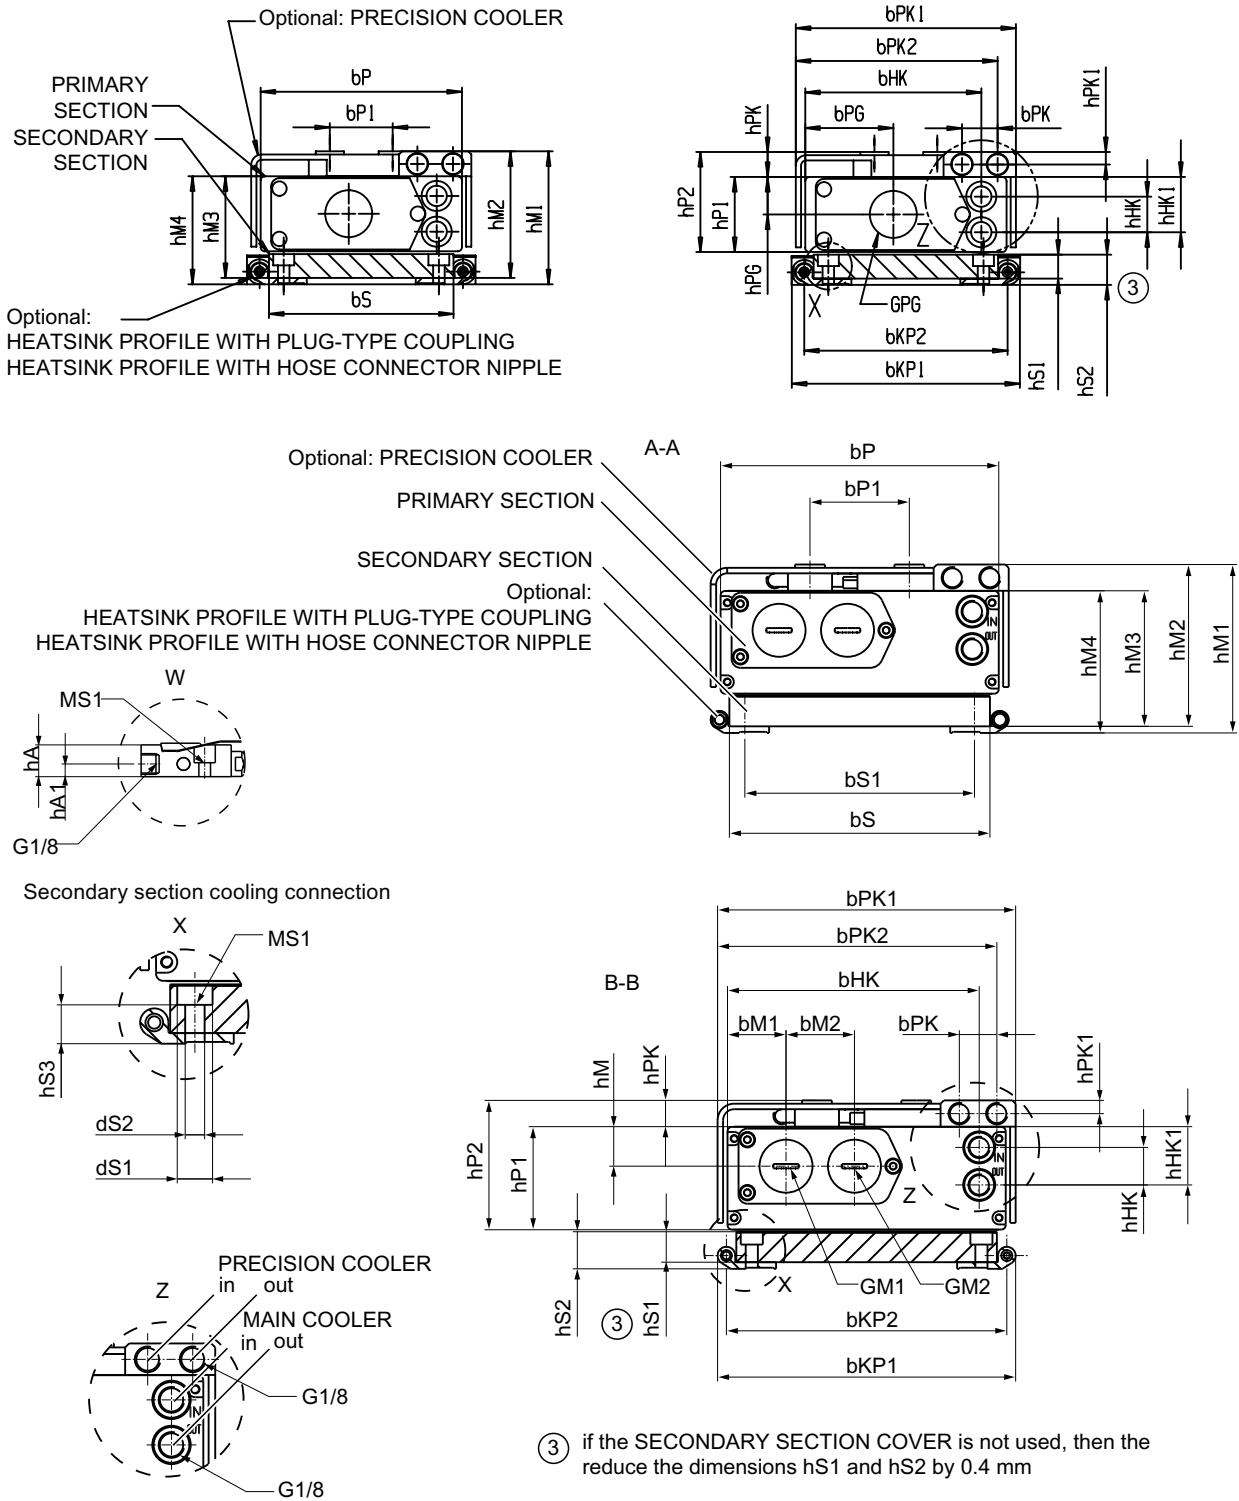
Installation dimensions for the motors 1FN3100 and 1FN3150 (cross sections and details)
